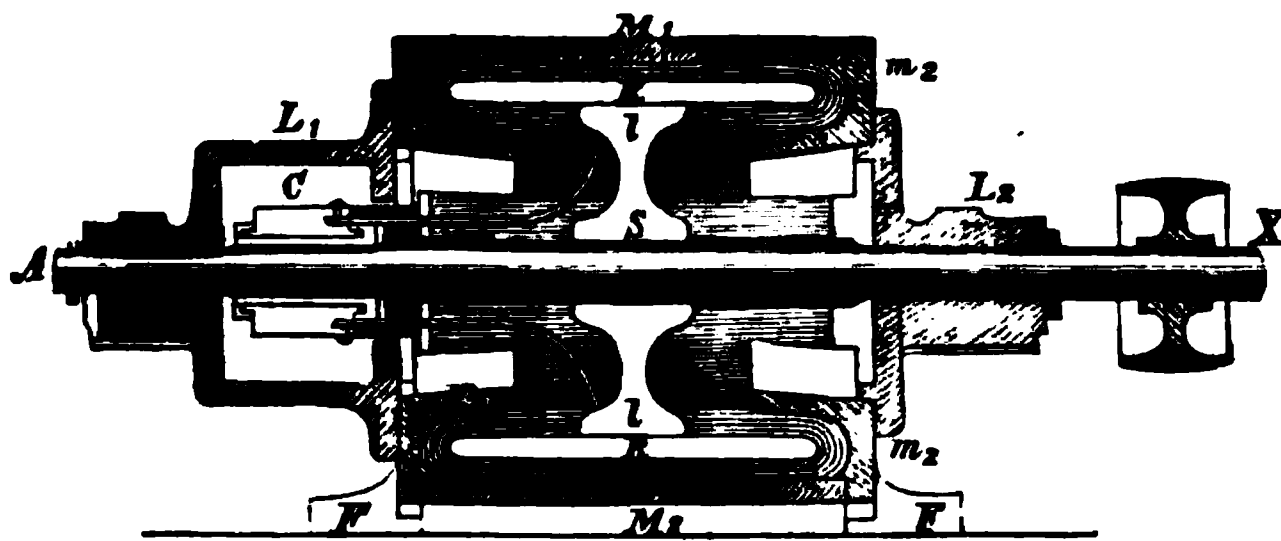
Section of the Schwerd-Scharnweber Machine.
